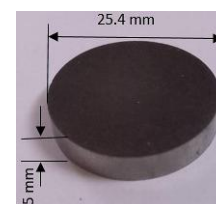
Workpiece before machining (25.4 mm diameter x 5mm Thickness)
